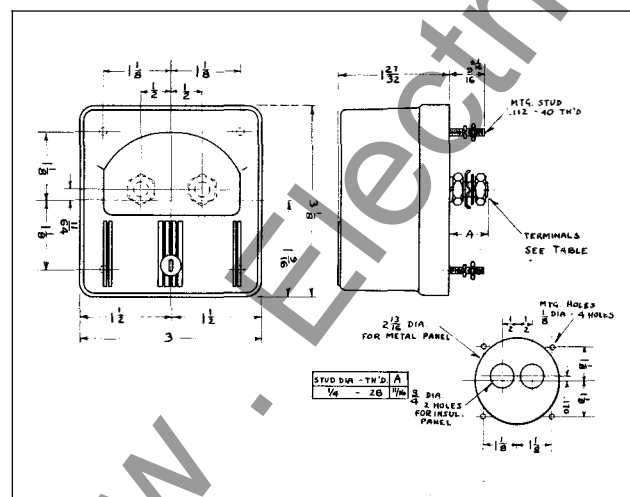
Outline and Drilling Plan of the Projection Type Test Milliammeter. For Reference Only.
